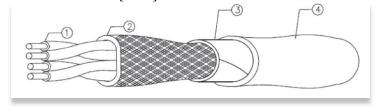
Cable layout, 1 = twisted wire, 2 = braided ground shield, 3&4 Insulation layers
